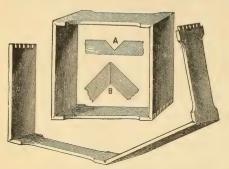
One-piece V-grooved sections. (From Gleanings.)
